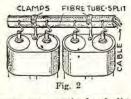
shows one method of distributing the secondary or high-tension cables on multi-cylinder engines. A divided fiber tube supported on brackets encloses the cables and permits of easy inspection or renewal if required. Any number of leads or cables can be distributed. The eight plug leads required for dual ignition on a four-cylinder engine can be accommodated in a two-inch fiber tube.
